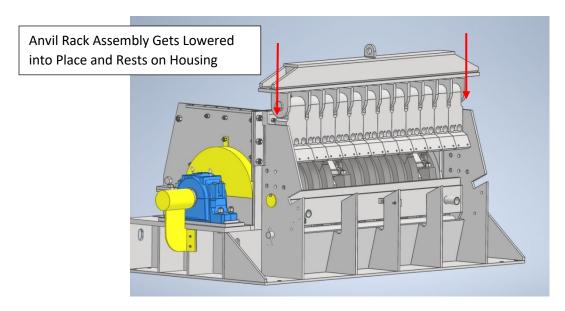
Hog with Anvil Rack Assembly Being Lowered into Place
